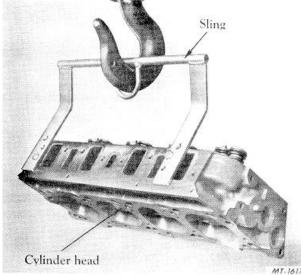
Cylinder Head Sling SE-1896 Installed on Head
